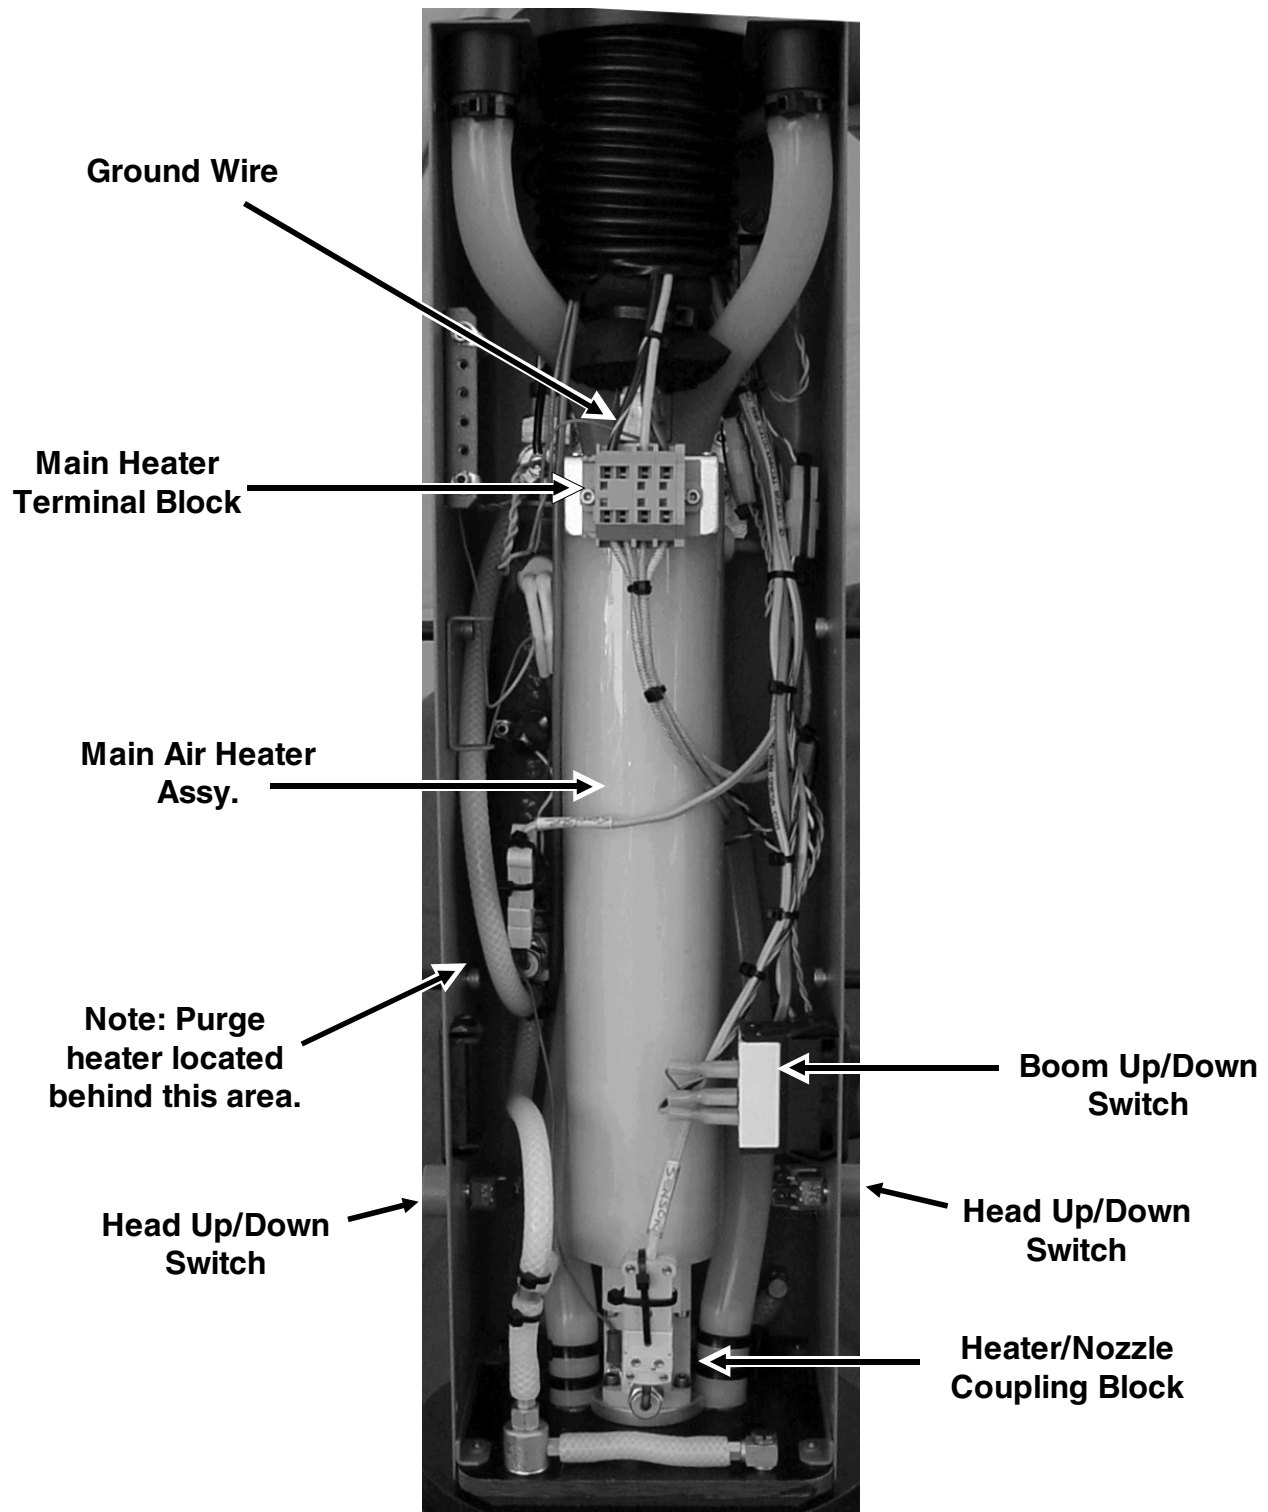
5, T-2500E Thermal Fixture - Inside View
